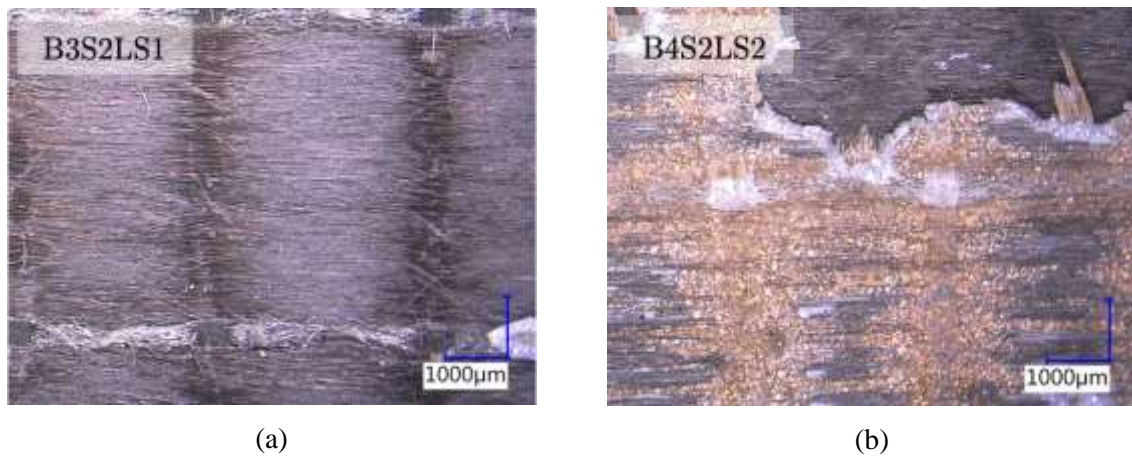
Fracture surfaces of DCB samples subjected to laser treatment. (a) LS1; (b) LS2.
